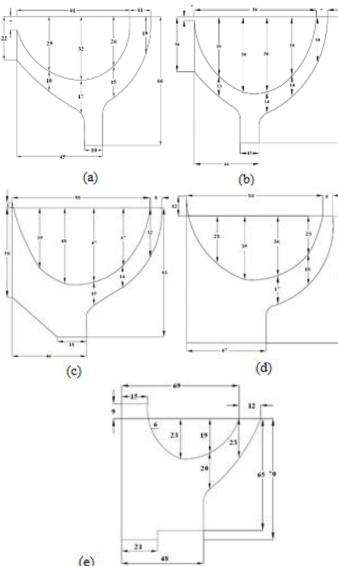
Five Section of Bucket Curvature: (a) Section Two, (b) Section Four, (c) Section Five, (d) Section Six and (e) Section Seven
